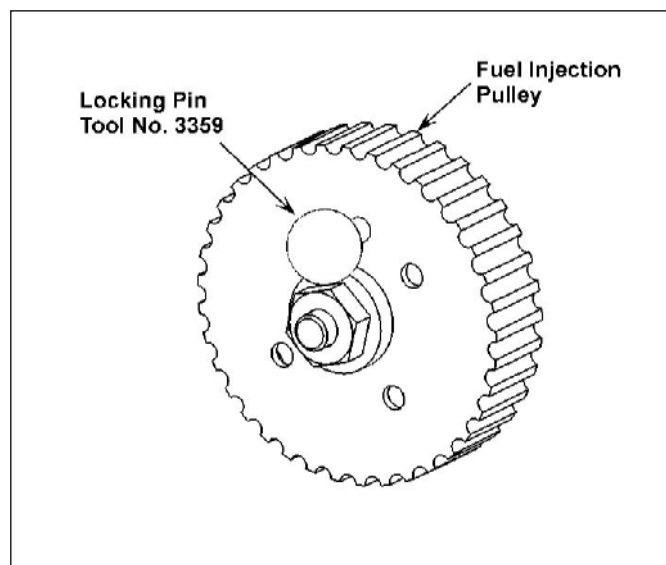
Pin Required to Lock the Fuel Injection Pump Before Belt Removal
